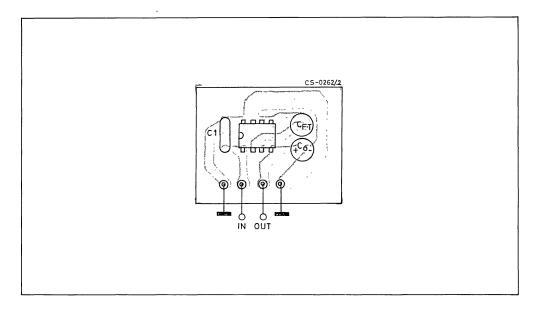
P.C. board and component layout of fig. 1 (1:1 scale)
